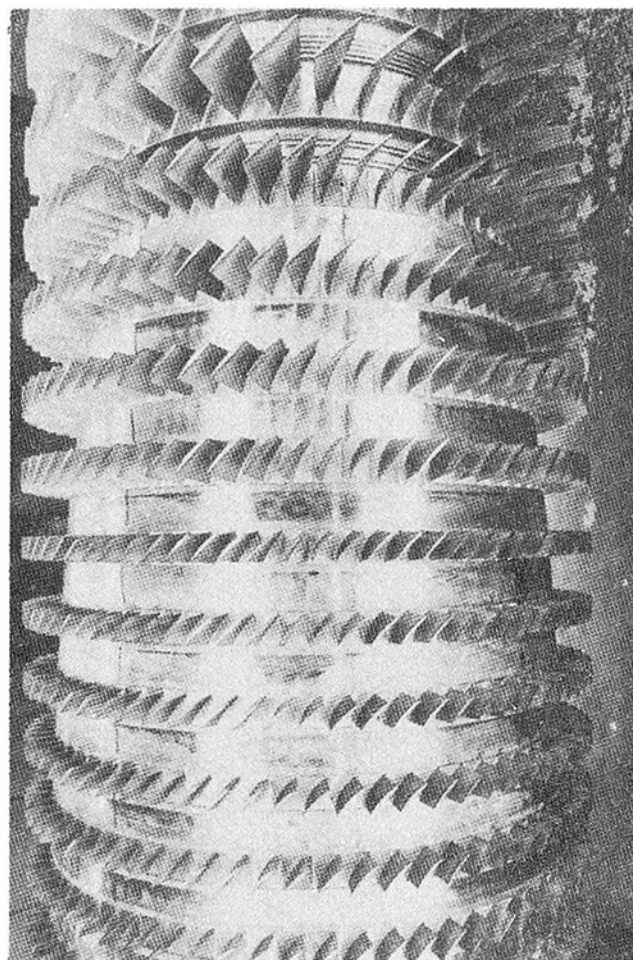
Uncoated Mars compressor rotor showing severe rub and metal transfer
